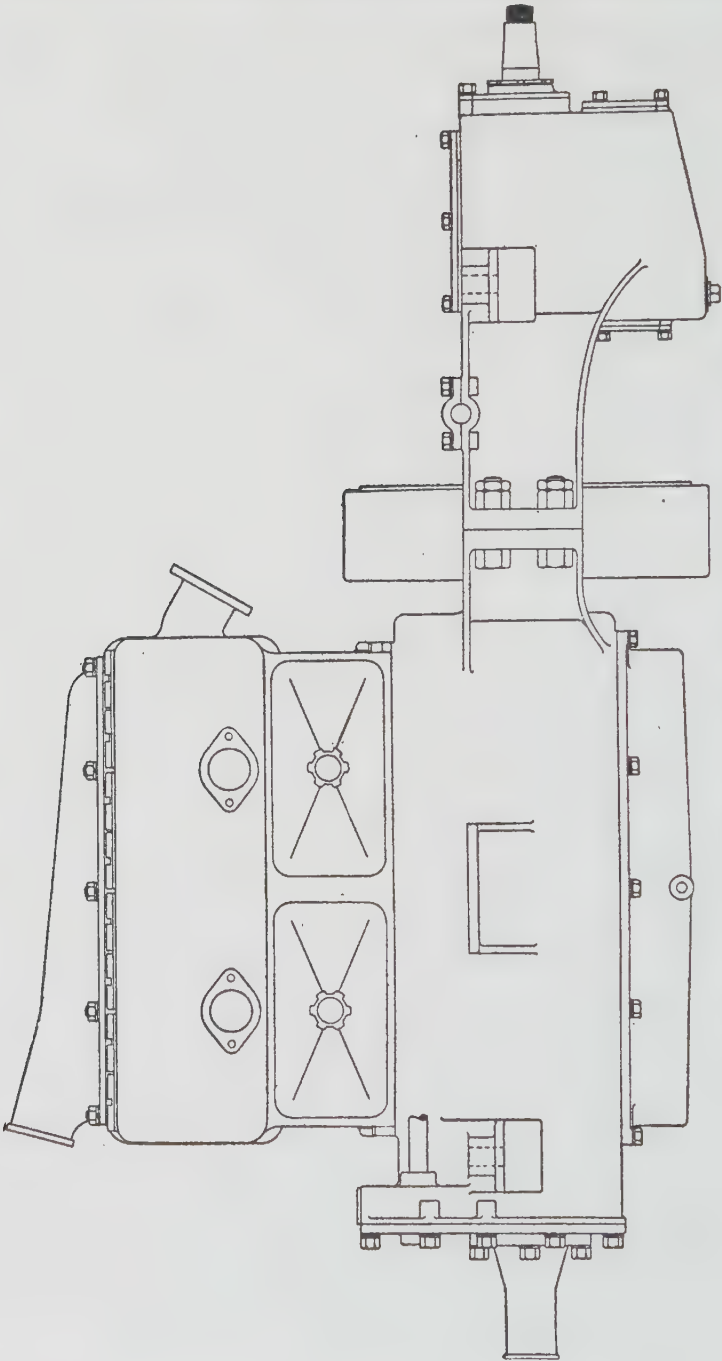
CRANK CASE AND GEAR BOX CONNECTED BY YOKE.
